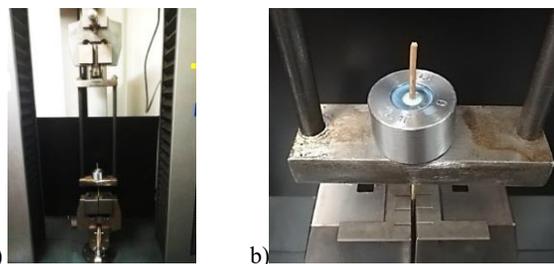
View of the measuring system (a) and drawing process of CuZn39Pb3 wire
